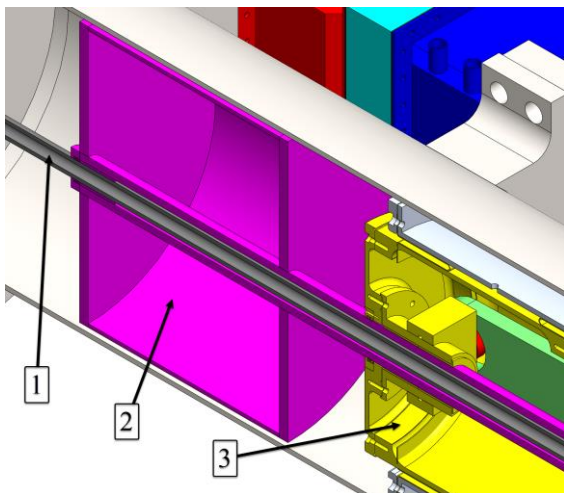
Close up view of the guide rod (1), displacer (2), and power piston assembly (3)
